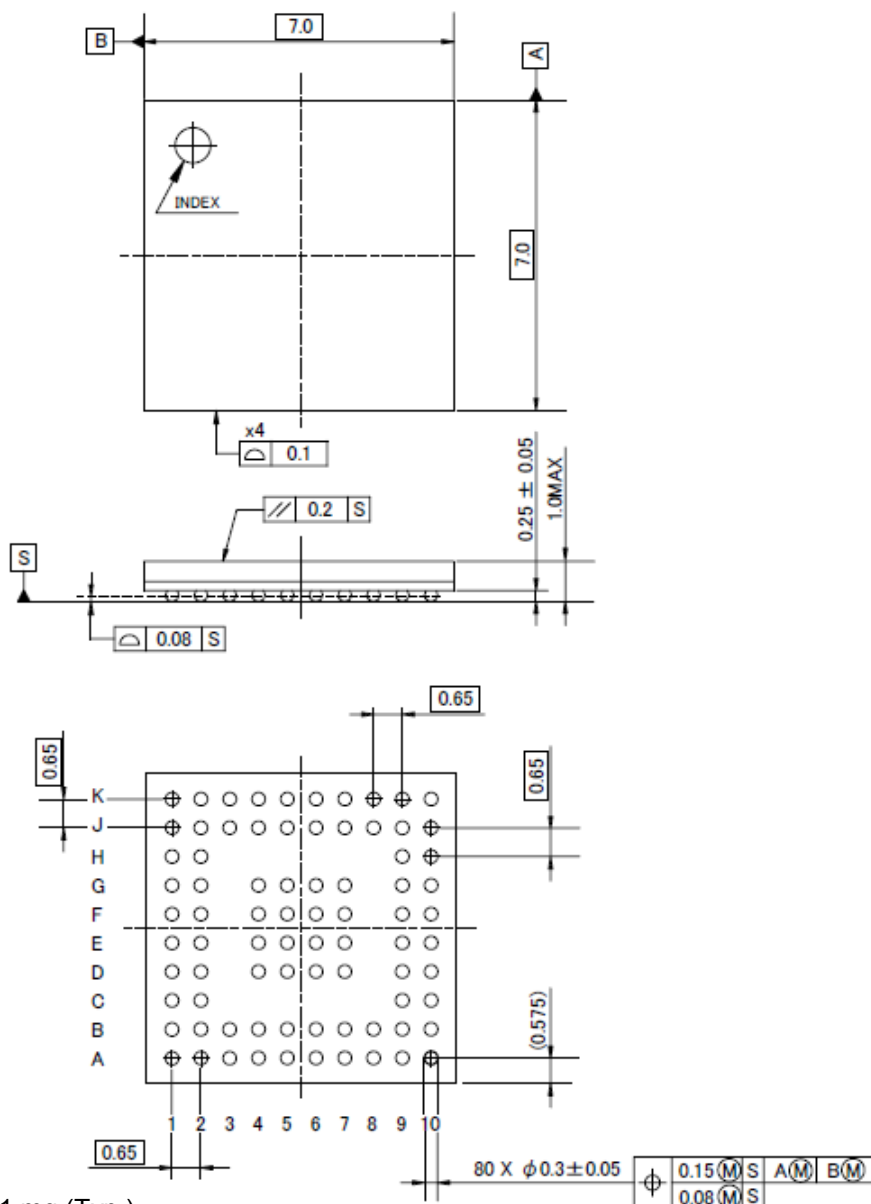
TC358778XB P-VFBGA80-0707-0.65-001 package
